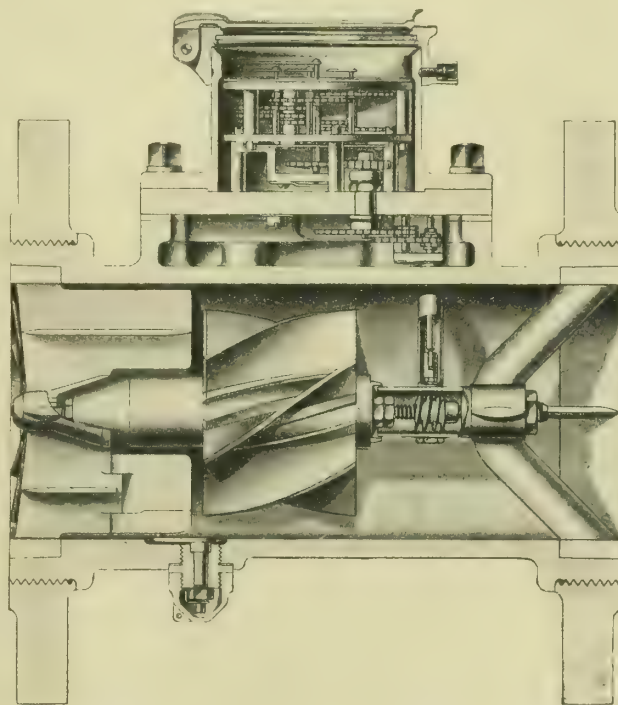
LONGITUDINAL SECTION OF THE HELIX METER, SHOWING DIAL GEAR. MESSRS. THE LEEDS METER COMPANY, LTD., LEEDS.
